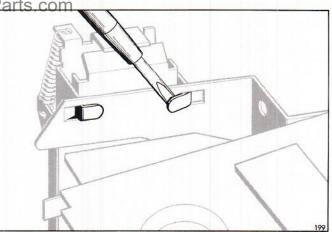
GATE ASSEMBLY (BOTTOM)
